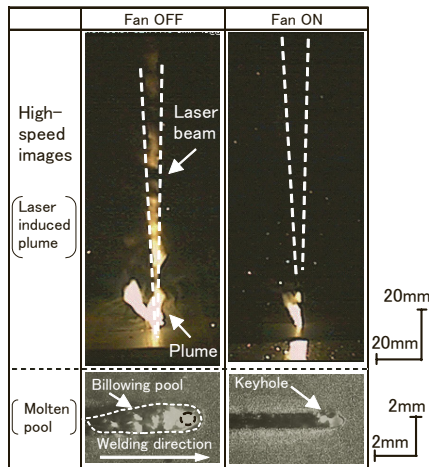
Laser-induced plume and molten pool observed during laser remote welding of steel with and without fan
